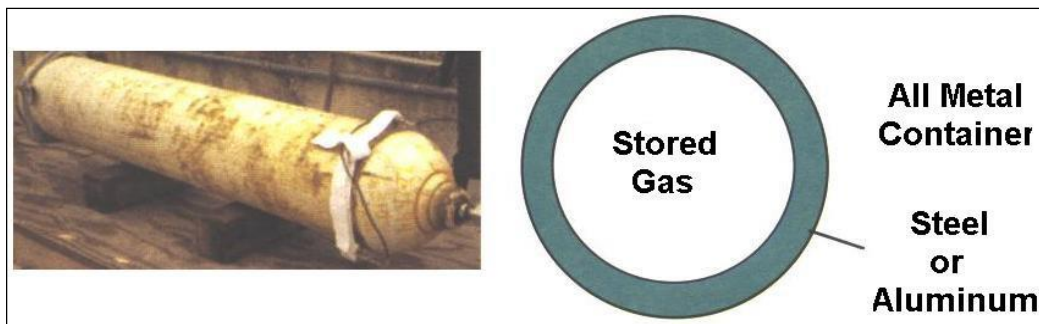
Typical Type 1 Metallic (Steel or Aluminum) Container
